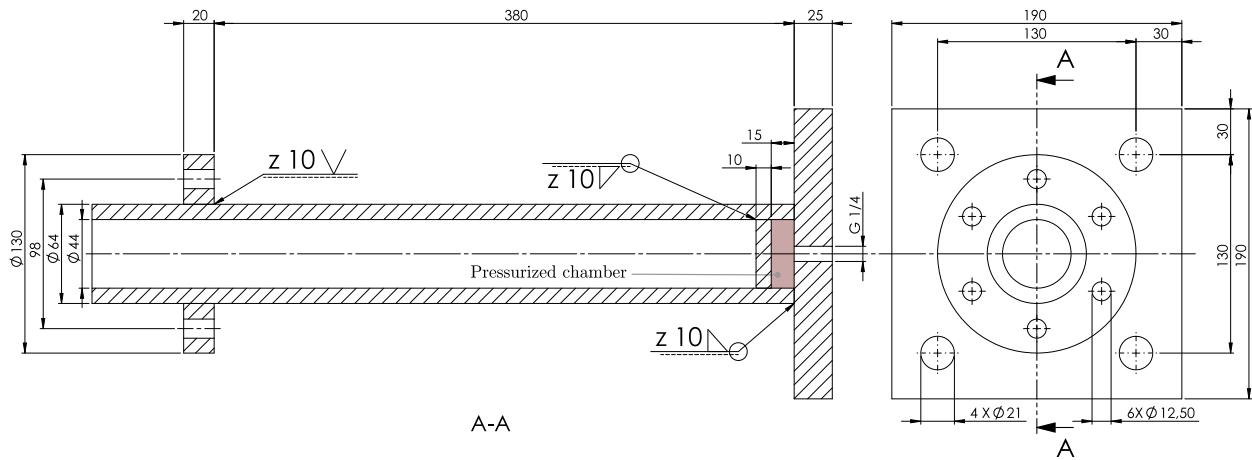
Technical drawing of the investigated pipe-to-plate welded joint with dimensions in millimetres and welding representation according to ISO 22553:1992.
